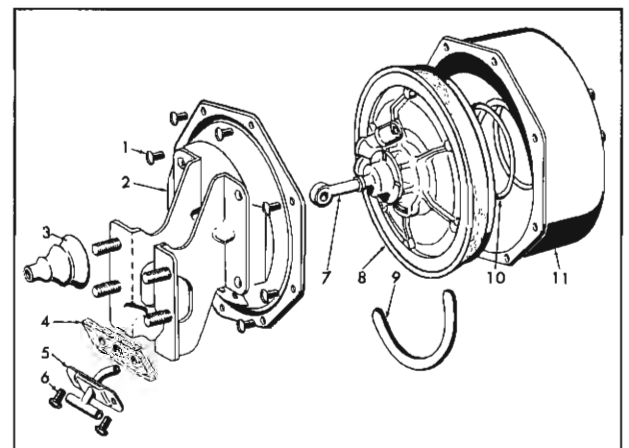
Removal of End Plate, Air Cleaner, Vacuum Piston and Spring from Vacuum Cylinder
